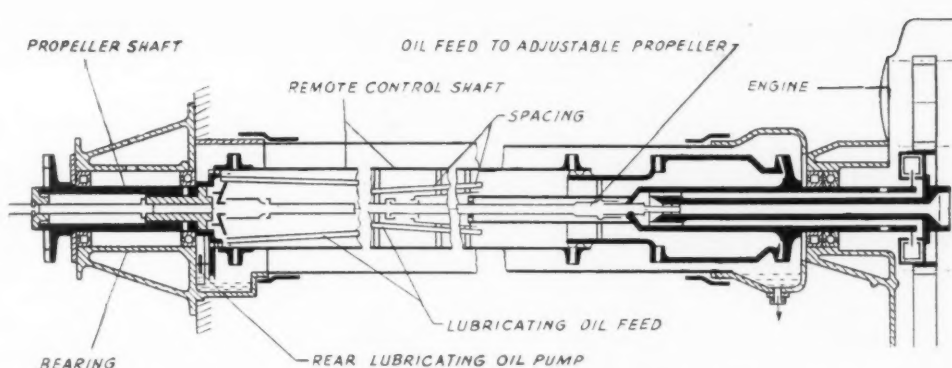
DIAGRAM OF JUNKERS EXTENSION SHAFT USED WITH A JUMO-205 DIESEL ENGINE TO DRIVE A PUSHER PROPELLER ON THE DORNIER DO 18 FLYING BOAT
